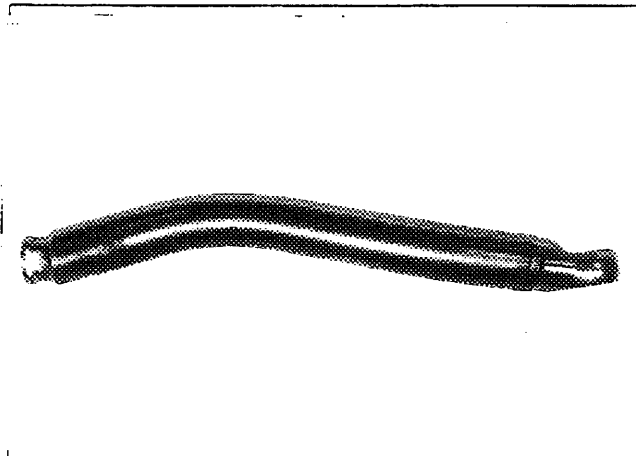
REINFORCED STEERING COLUMN TYPE A
